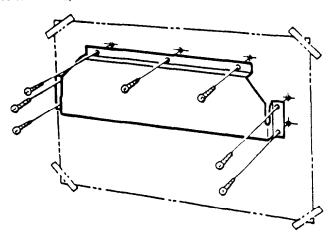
Attaching the Wall Mount Bracket of the Level II
